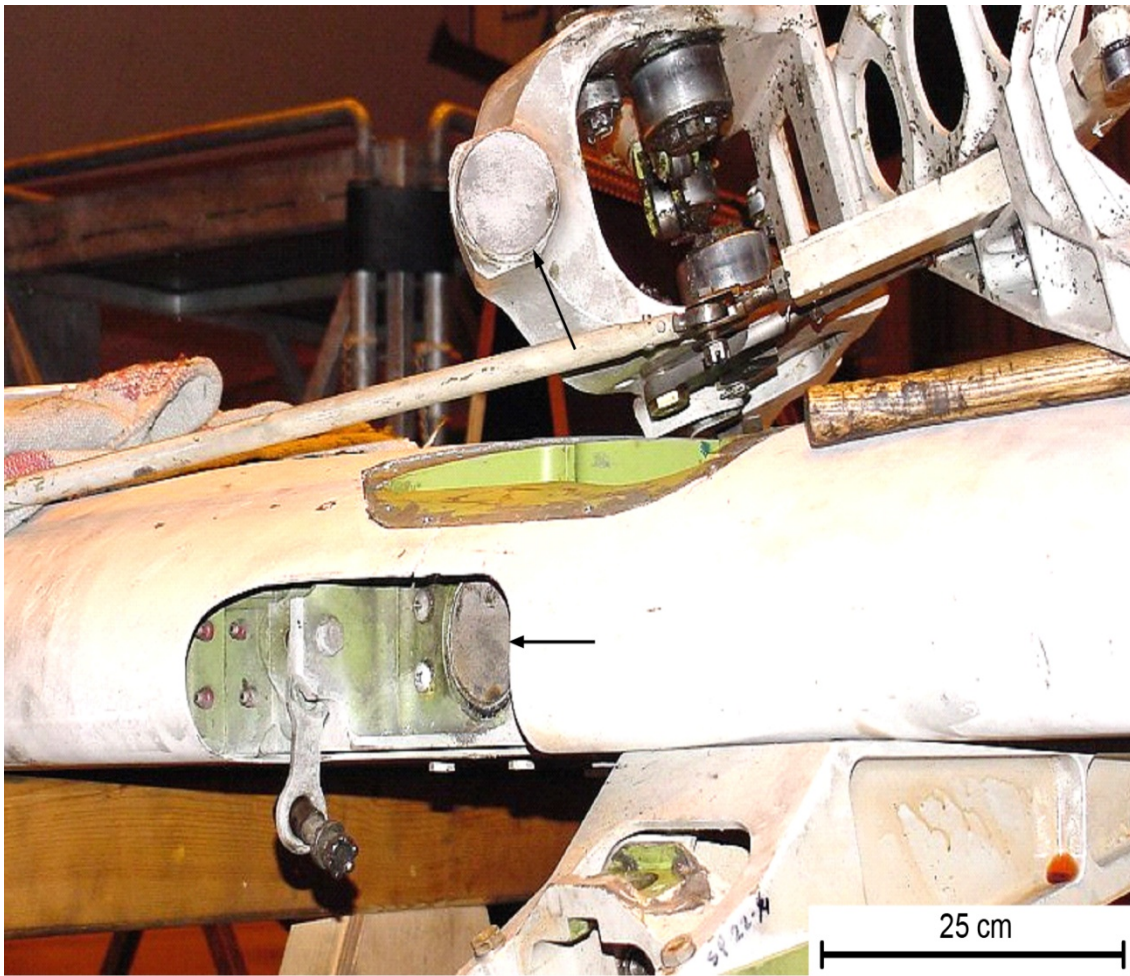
Case History 20.5.3 – Broken Inboard Carriage Assembly *In Situ* (arrows point to the fracture surfaces).
